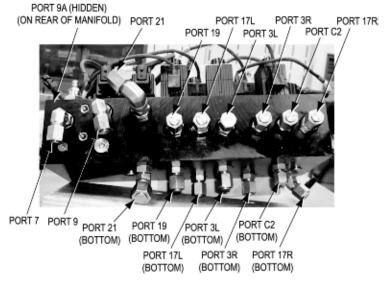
Identification of HDC Primary Manifold Assembly ports
